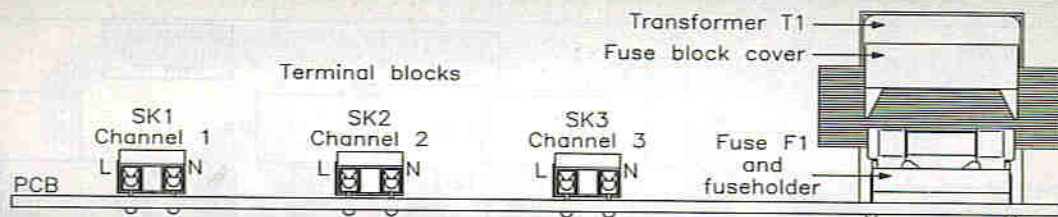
Mounting the PCB terminal blocks, transformer T1, and fuse F1.
